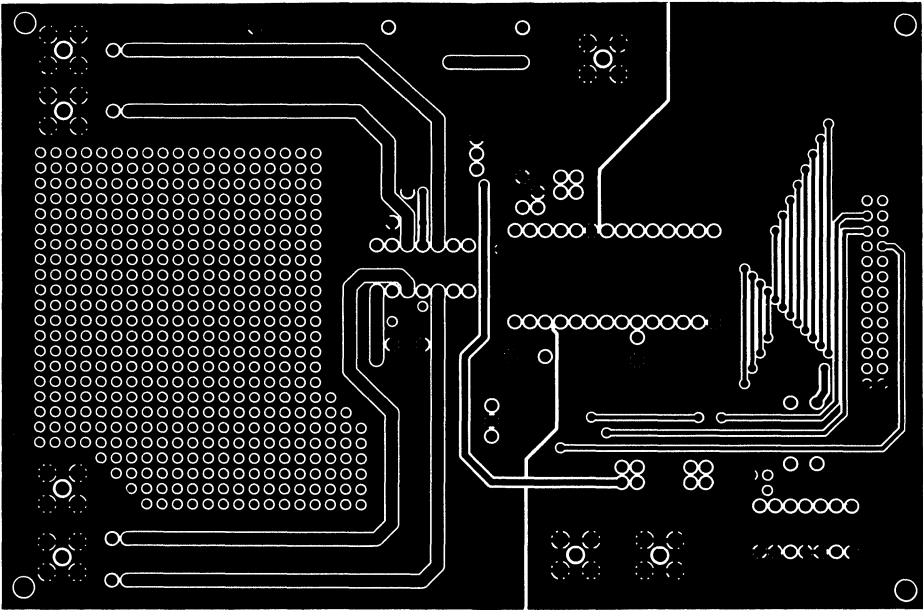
PCB Component Side Layout for the Circuit of Figure 20
